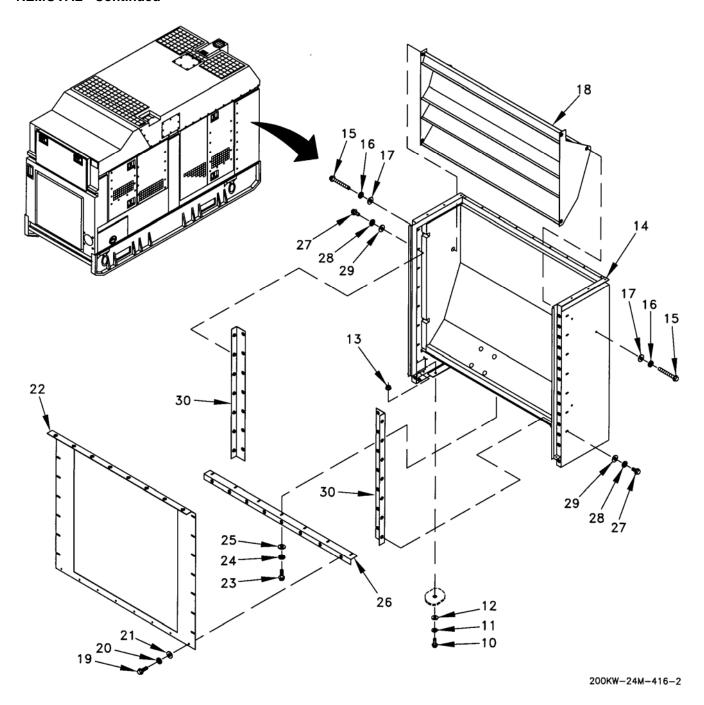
Front Section Housing Assembly (Sheet 2 of 2).
